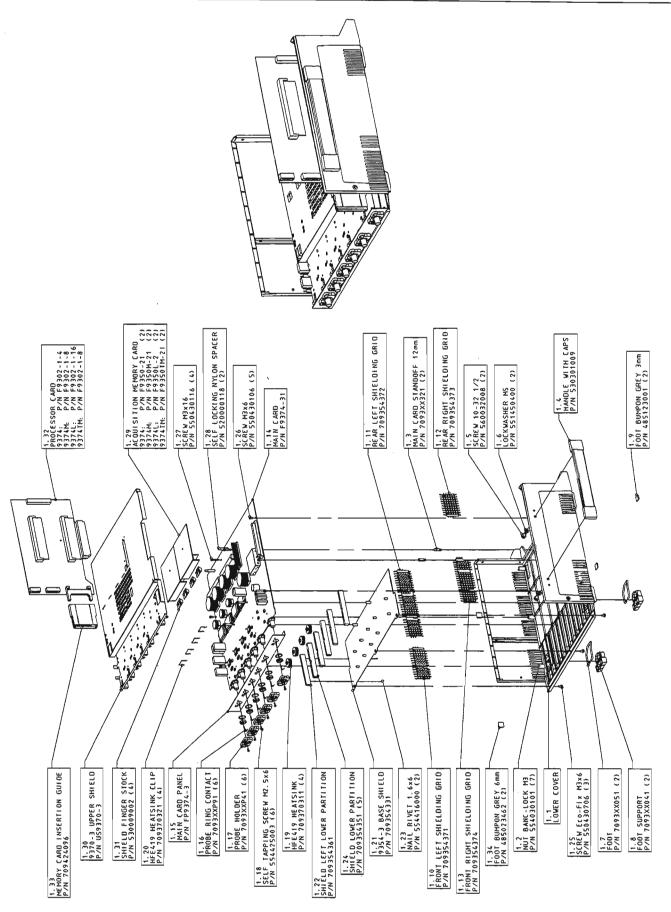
9374/M/L/TM Lower Cover Assembly
